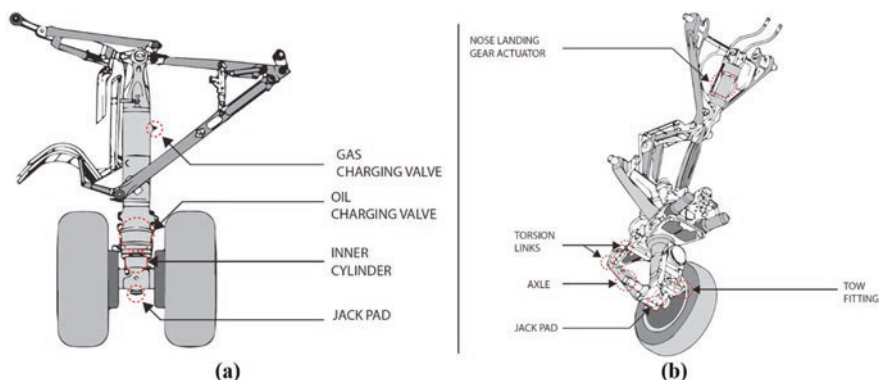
Boeing 737 aircraft landing gear attachment points: (a) main landing gear and (b) nose landing gear
